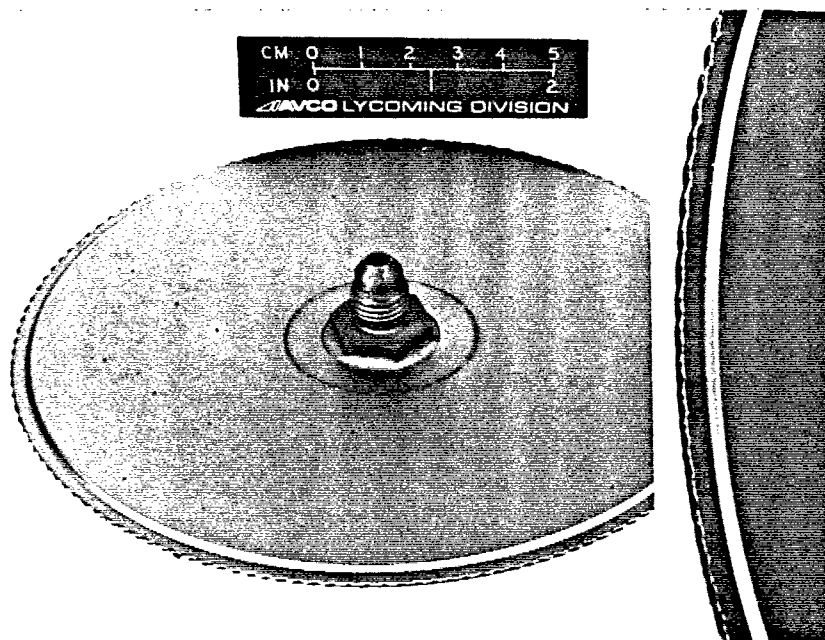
Pillow Specimen, Sawtooth Edge Weld
